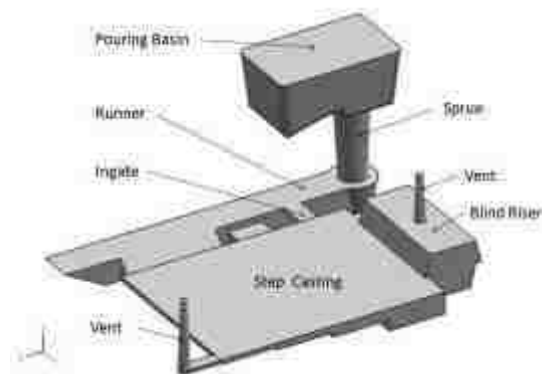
3-dimensional rendering of the step casting with a gating and riser system [20].
